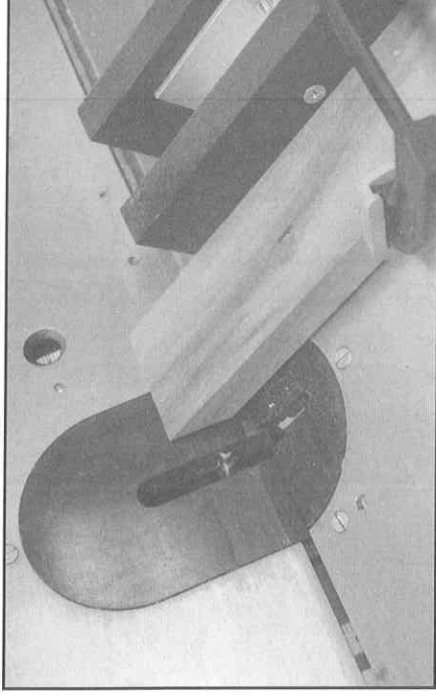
Make the top pin cut by using miter gauge and moving workpiece from right-to-left.
